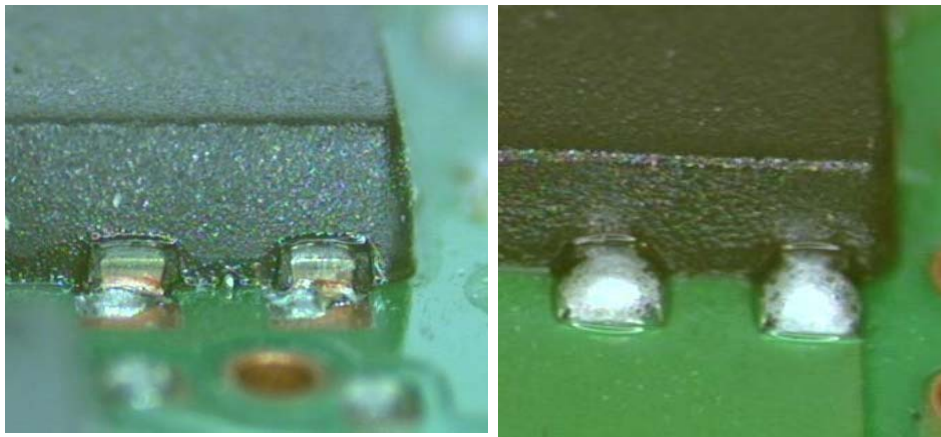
Example of Good Solder Pad Design plus Good Solder Reflow Process versus a Non Optimized Design
